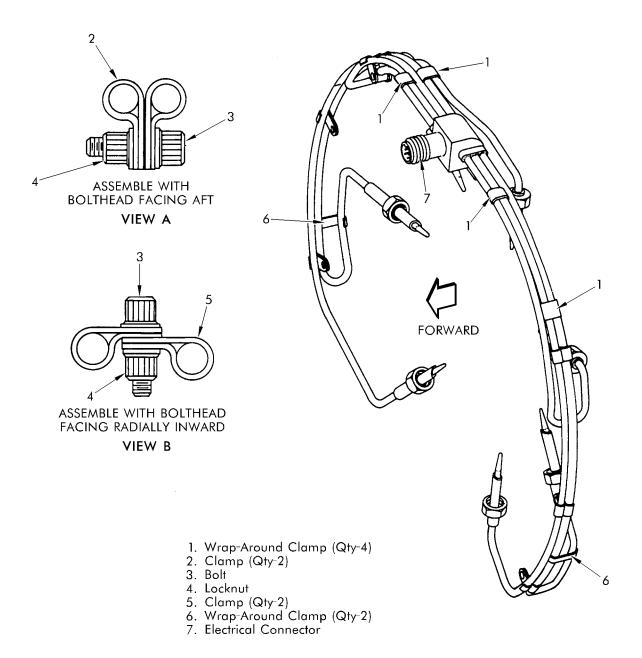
Thermocouple Assembly Wrap-Around Clamps (Former Configuration); Repair
